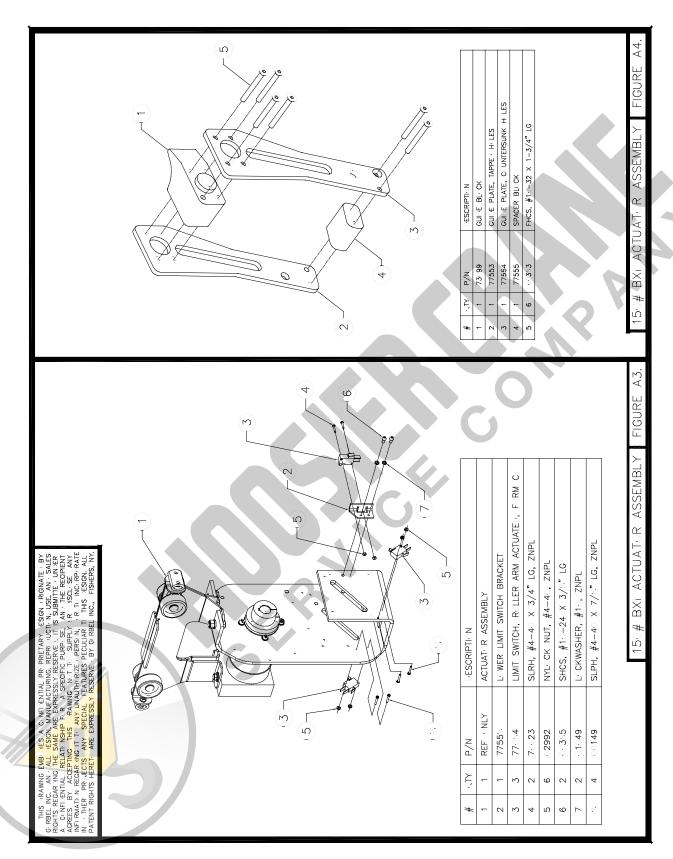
(bottom) & Figure A4 (top). 150# BXi Actuator Assembly.
